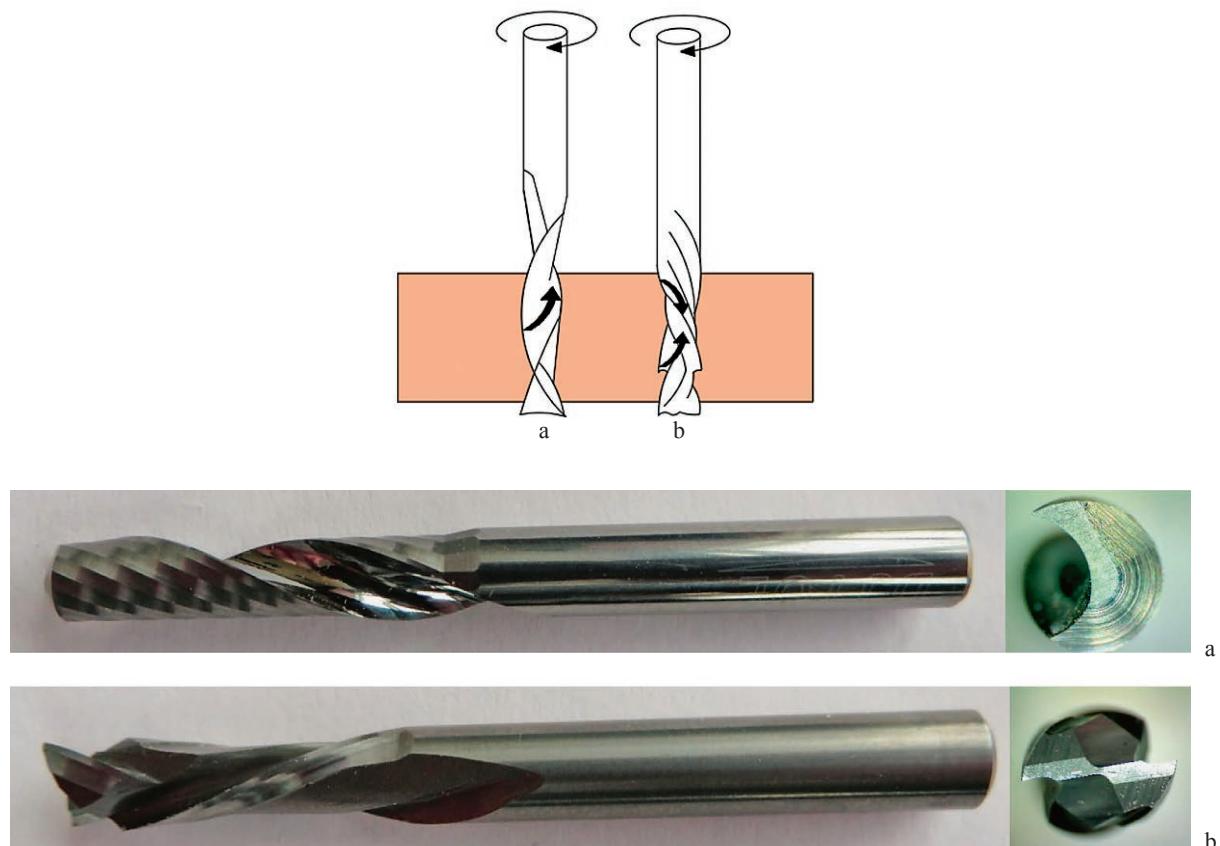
Cutter types: a) Carbide upcut milling cutter, discharges chips upwards b) Carbide compression (positive-negative) milling cutter, discharges chips from both the top and bottom
